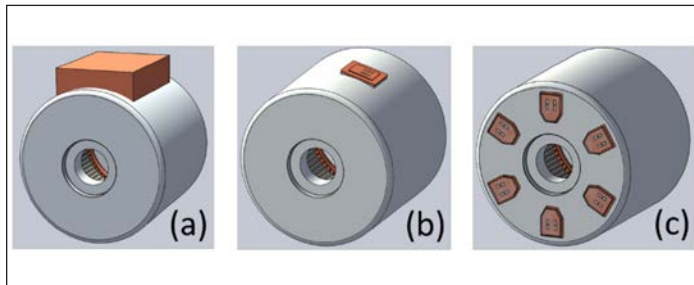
Integration concepts: (a) separate PE enclosure attached to the motor case, (b) PE distributed/mounted radially on the motor casing, and (c) PE integrated axially in the motor front/back plate.
